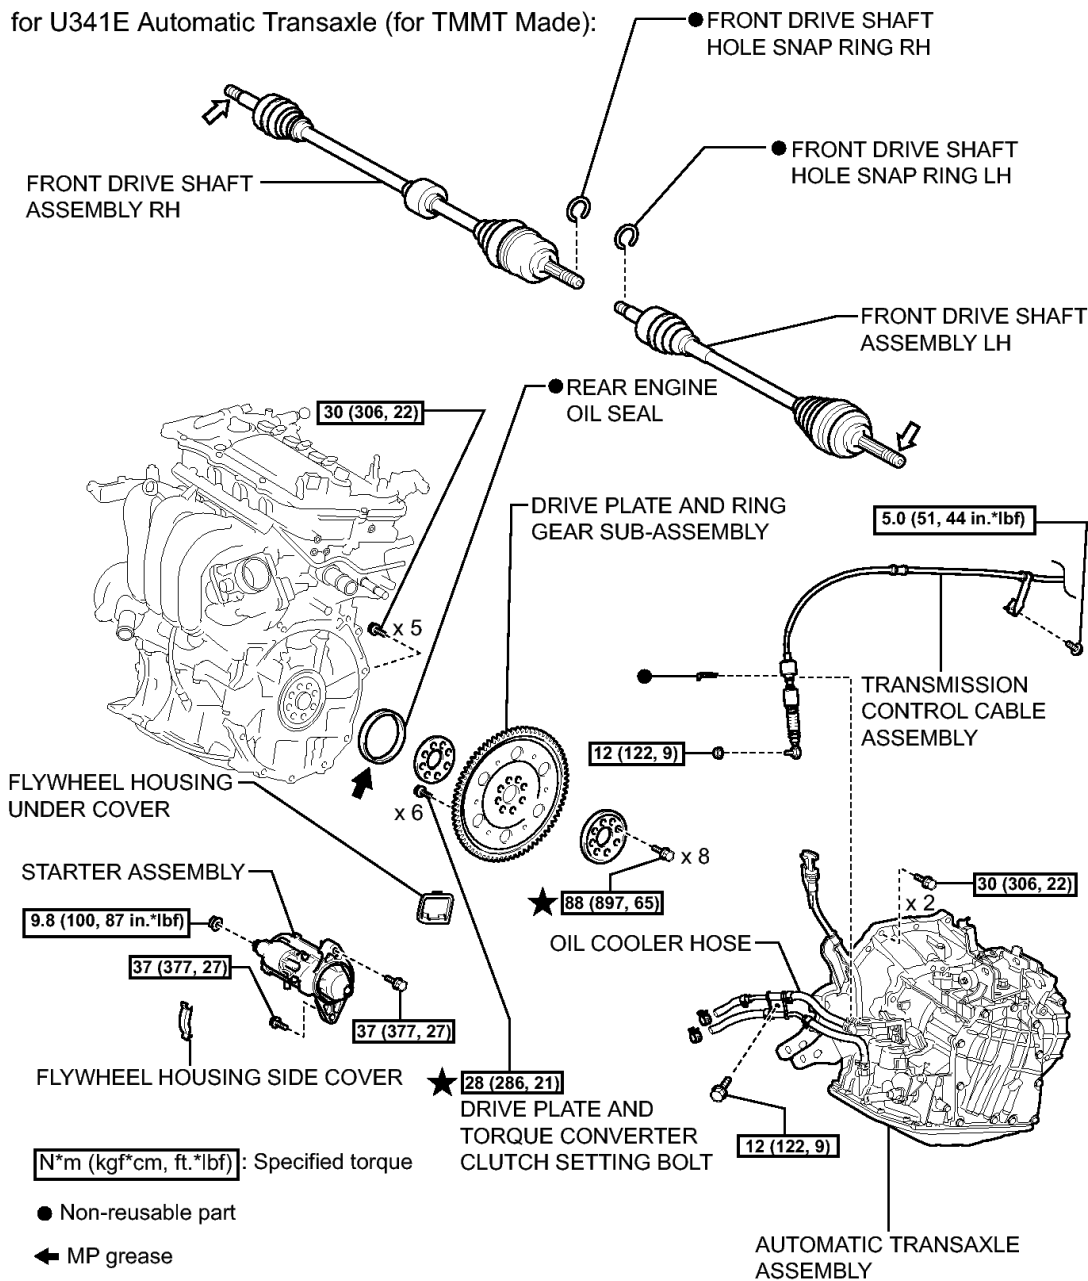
Identifying Rear Crankshaft Oil Seal Replacement Components With Torque Specifications (3 Of 3)
